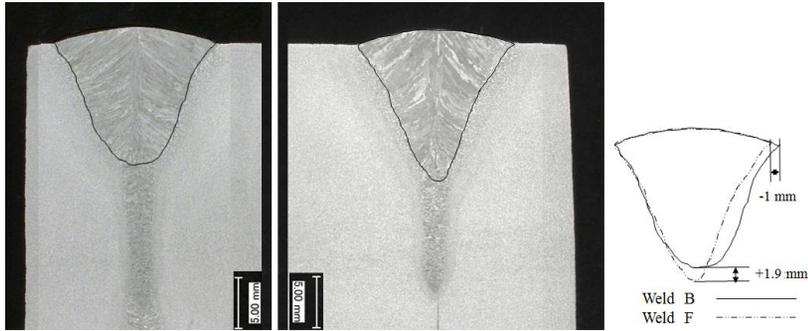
(Left) Weld B with process distances = 19 mm; (Right) Weld F with process distances = 15 mm
